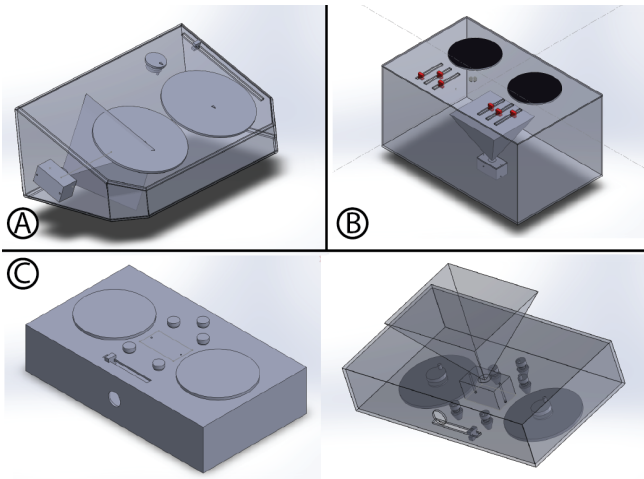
Our three user study participants prototyped DJ mixing boards using our component library. Each had a very different strategy for ensuring the camera could see all components. The assembly on the bottom (with interior cutaway view at right) was designed to have the camera inside reflecting off mirrors placed on the back wall.
